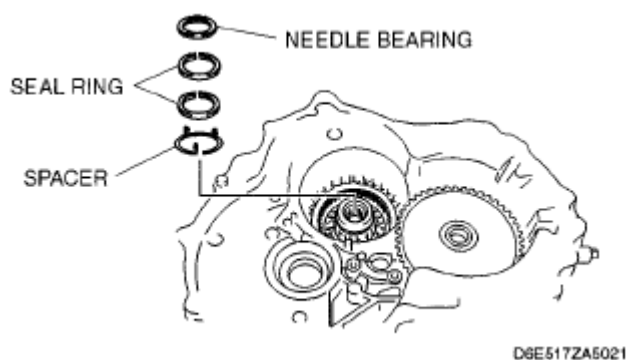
View Of Needle Bearing, Seal Rings And Spacer
